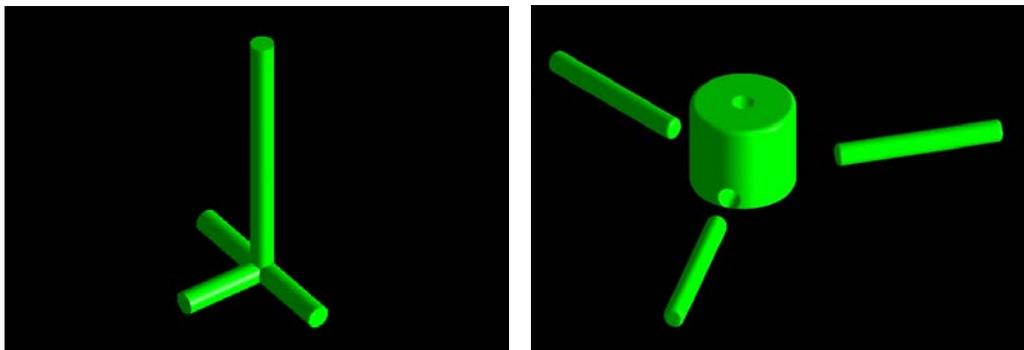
CAD models of the original base design (left) and final base structure (right) of the exercise machine.
